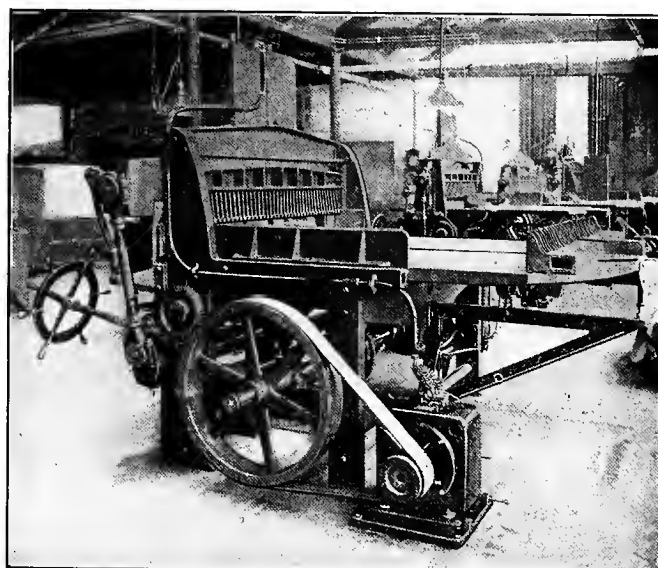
MOTOR-DRIVEN PAPER CUTTER.
